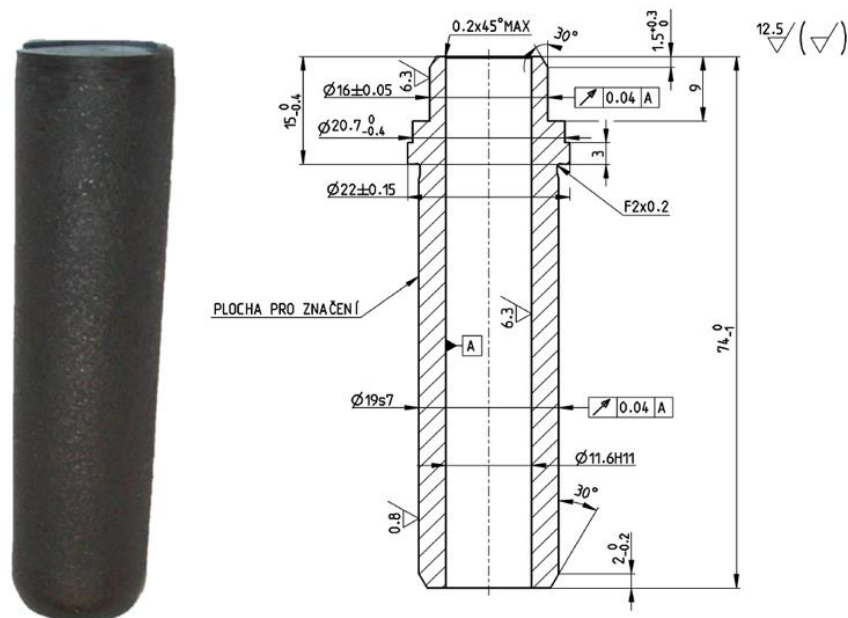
TEDOM valve guide raw part and drawing for valve guide
